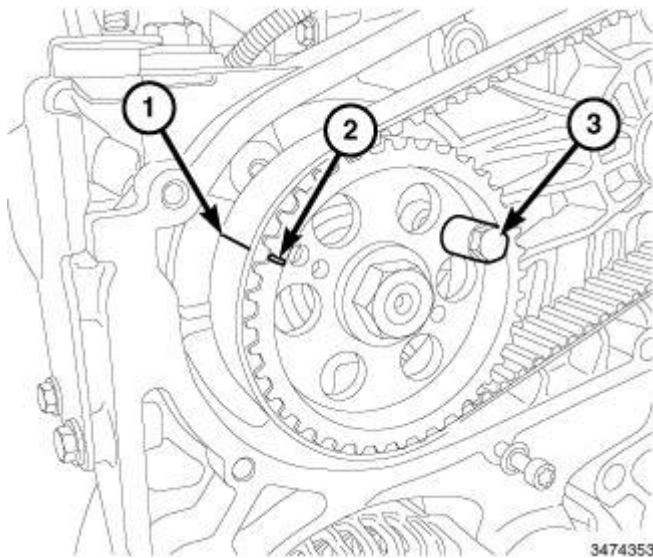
Aligning Timing Marks On Belt & Sprocket Using Removal/Refitting Tool
